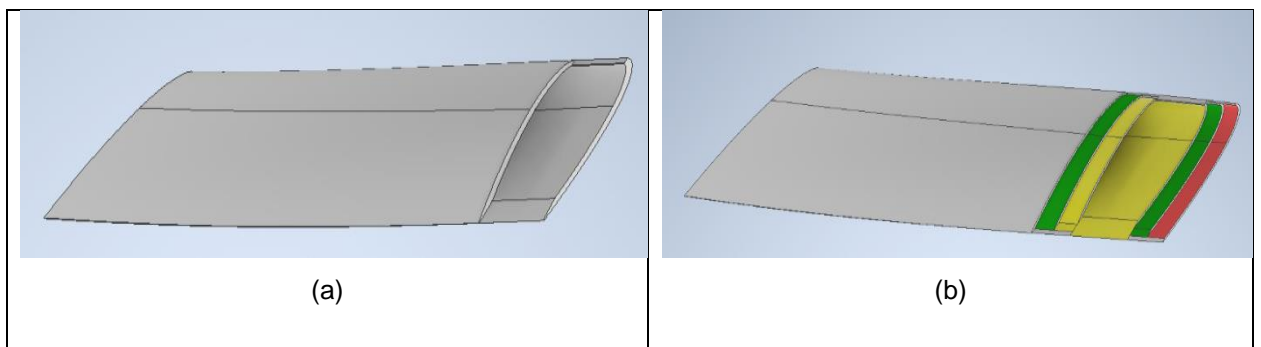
(a) Open Lap-joint of Blade section; (b) Fig: Step Joint on each side of Blade.
